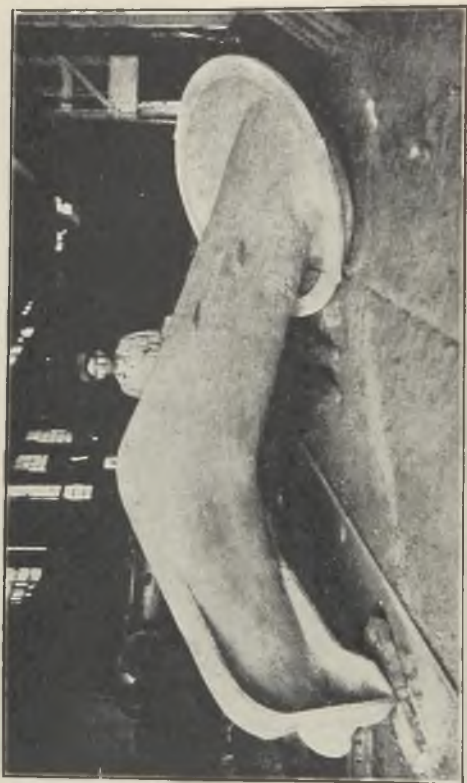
FINISHED CASTING FROM THE MOULD SHOWN IN FIG. 15.
